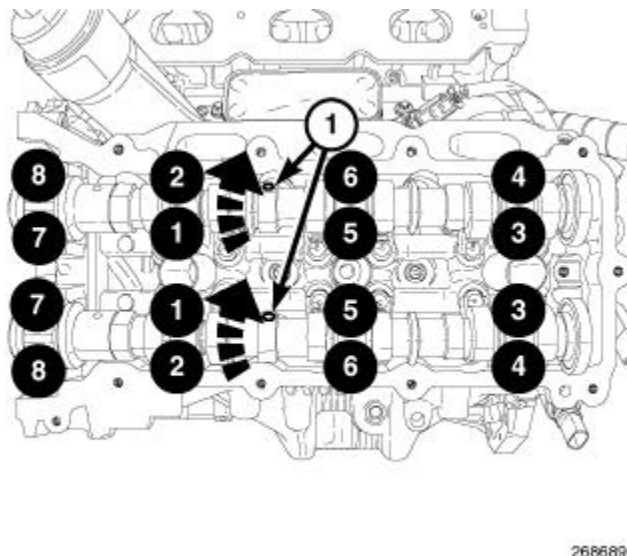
Bearing Cap Retaining Bolts Tightening Sequence - Left
